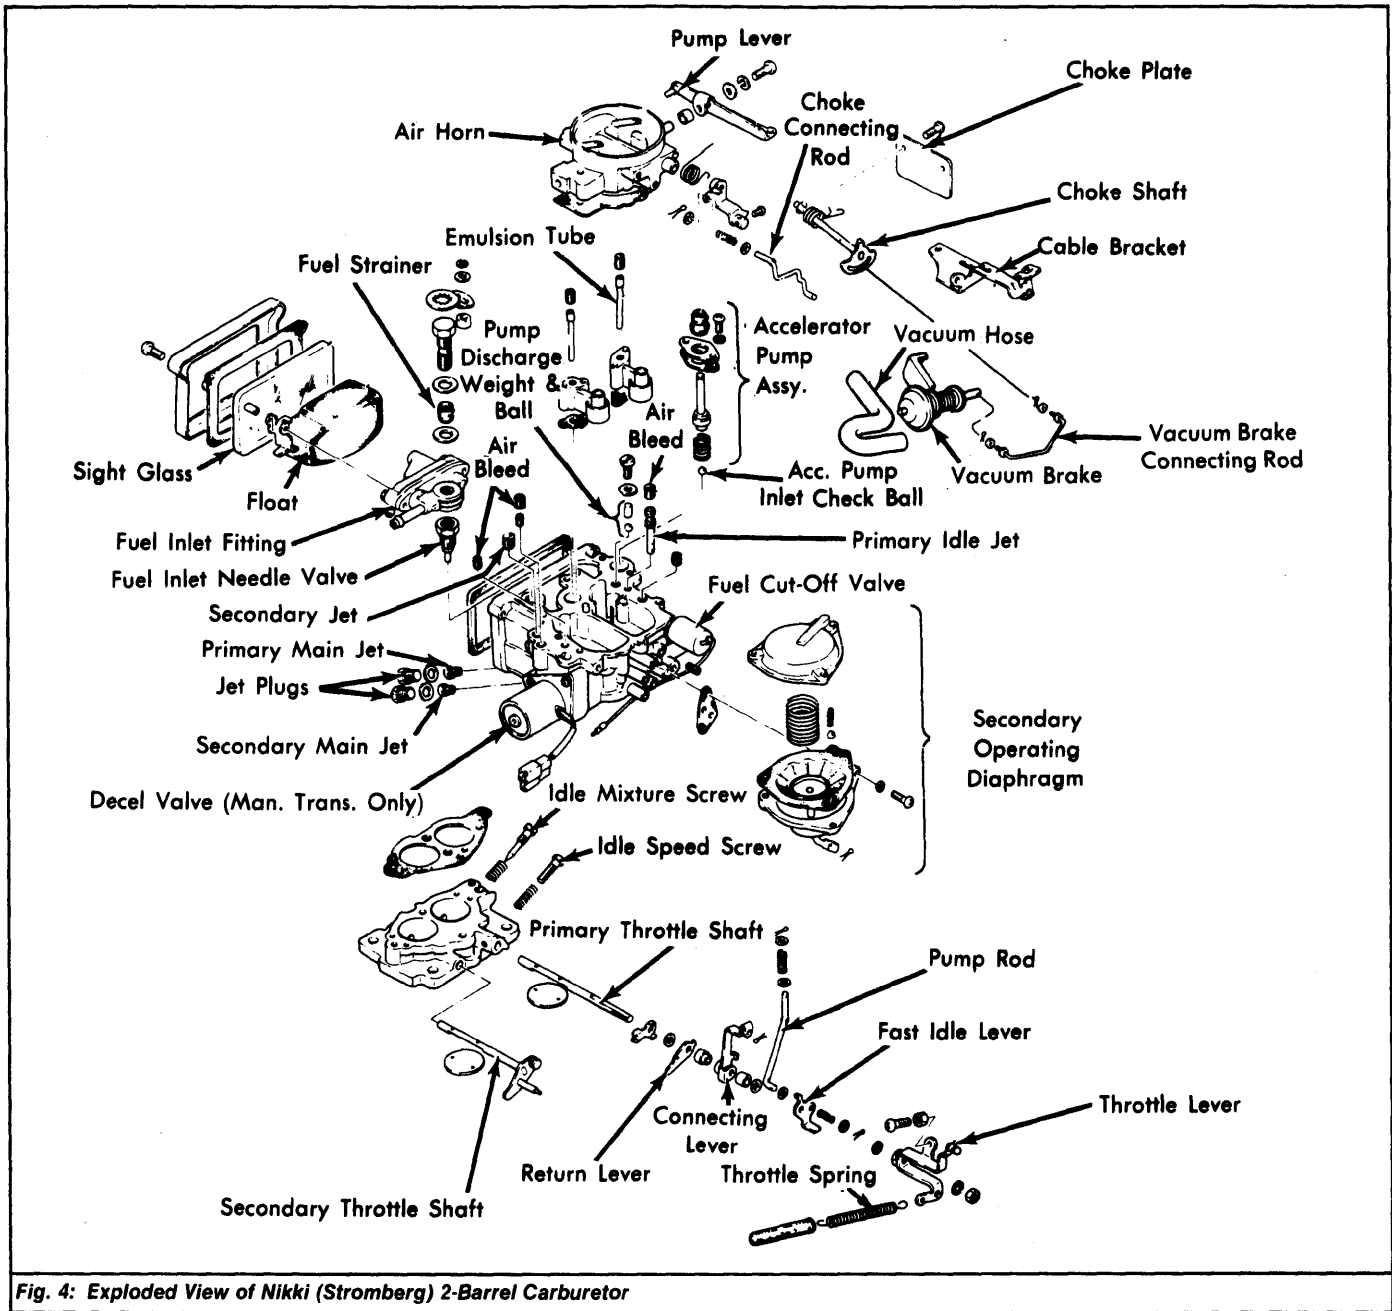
Exploded View of Nikki (Stromberg) 2-Barrel Carburetor
